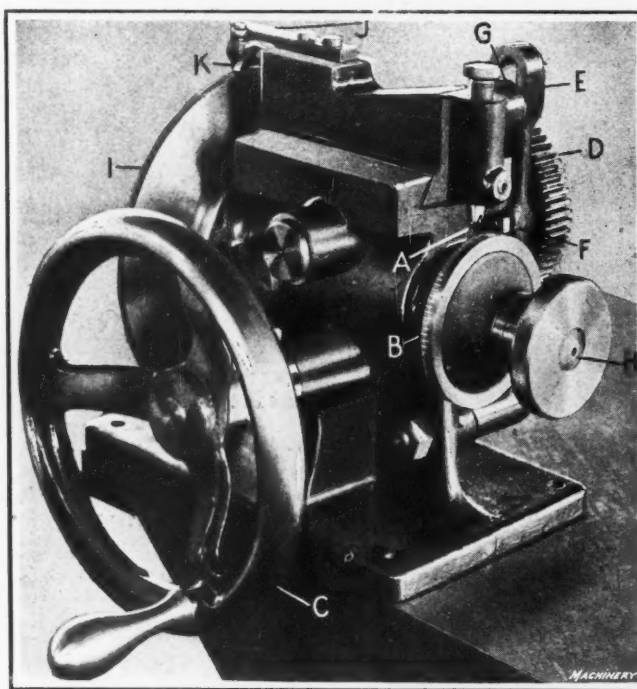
Special Machine designed for rolling Graduation Marks into Feed Collars used on Conradson Engine Lathes
